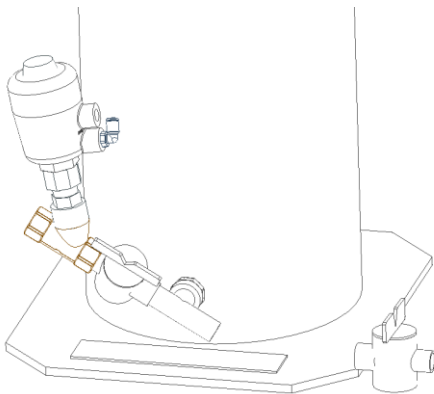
, CONNECTION / ASSEMBLY OF THE PNEUMATIC VALVE
